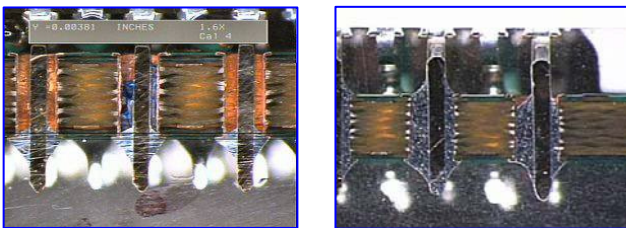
Unacceptable wave solder hole fill (L) and acceptable hole fill (R)
